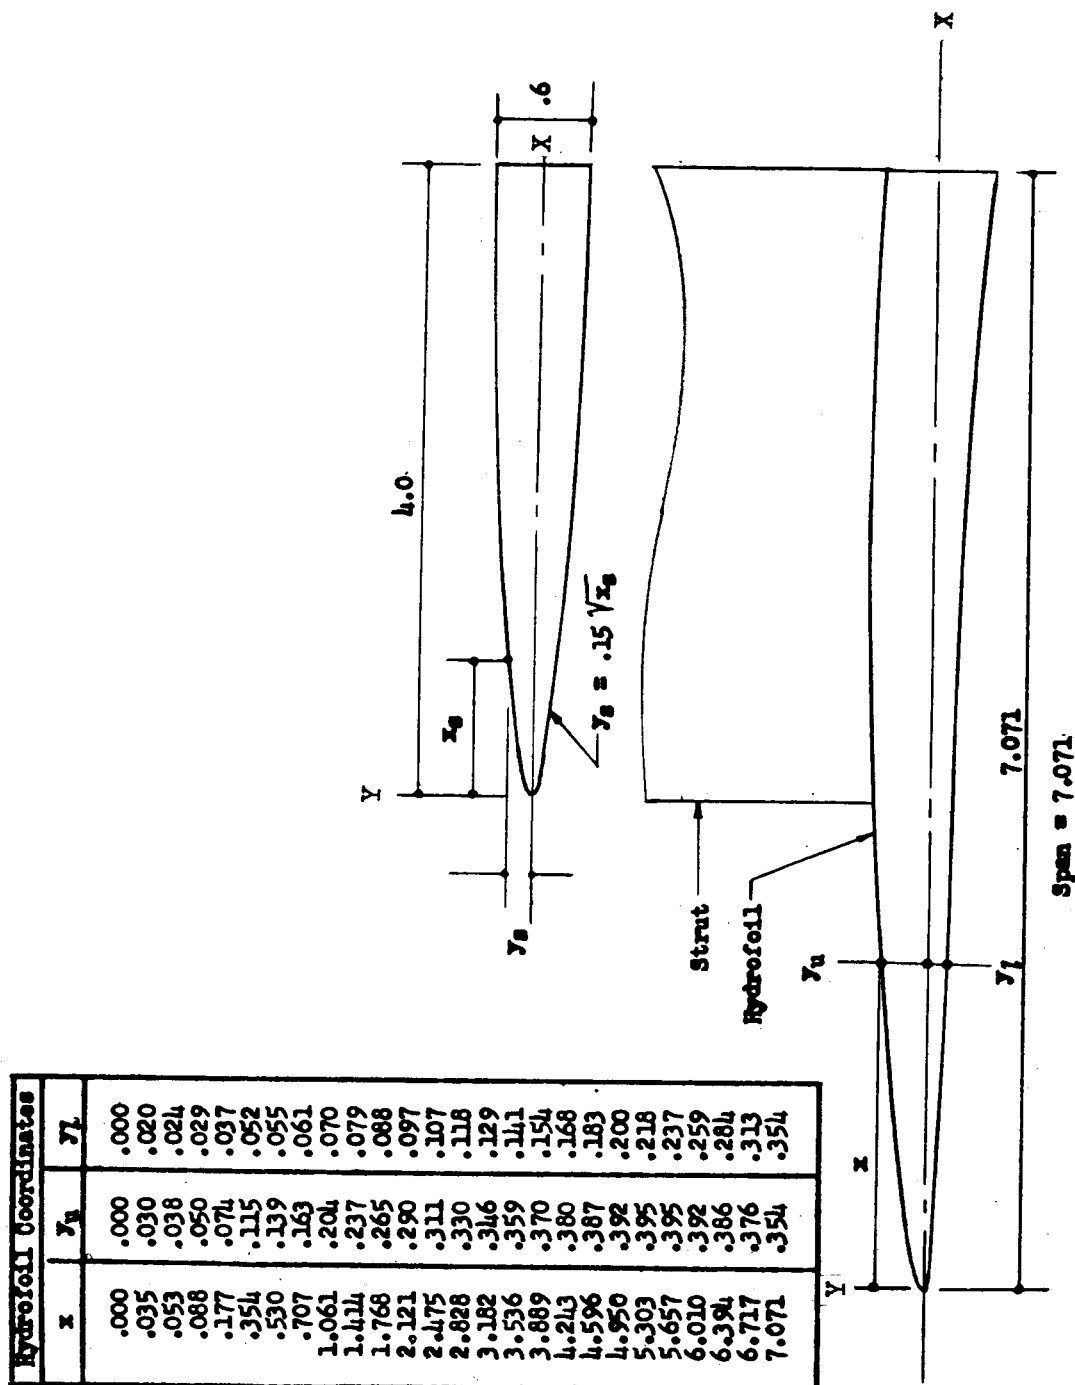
Details of cambered-parabolic hydrofoil and supporting strut. All dimensions are in inches.
